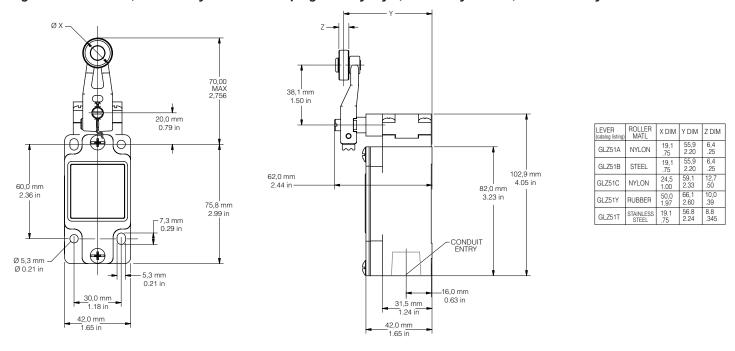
Fixed Lever, Side Rotary Switch - Plug-in Body Style, GLZ51 Style Lever, and GLB Body
